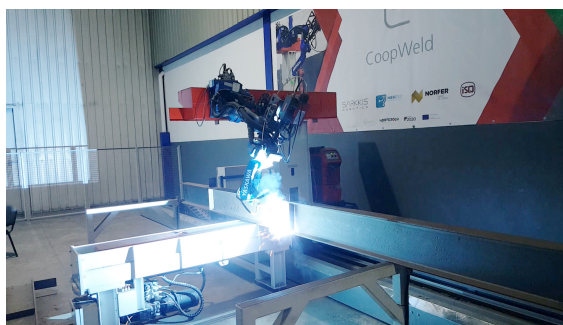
Examples of Welding Installation by SARKKIS
